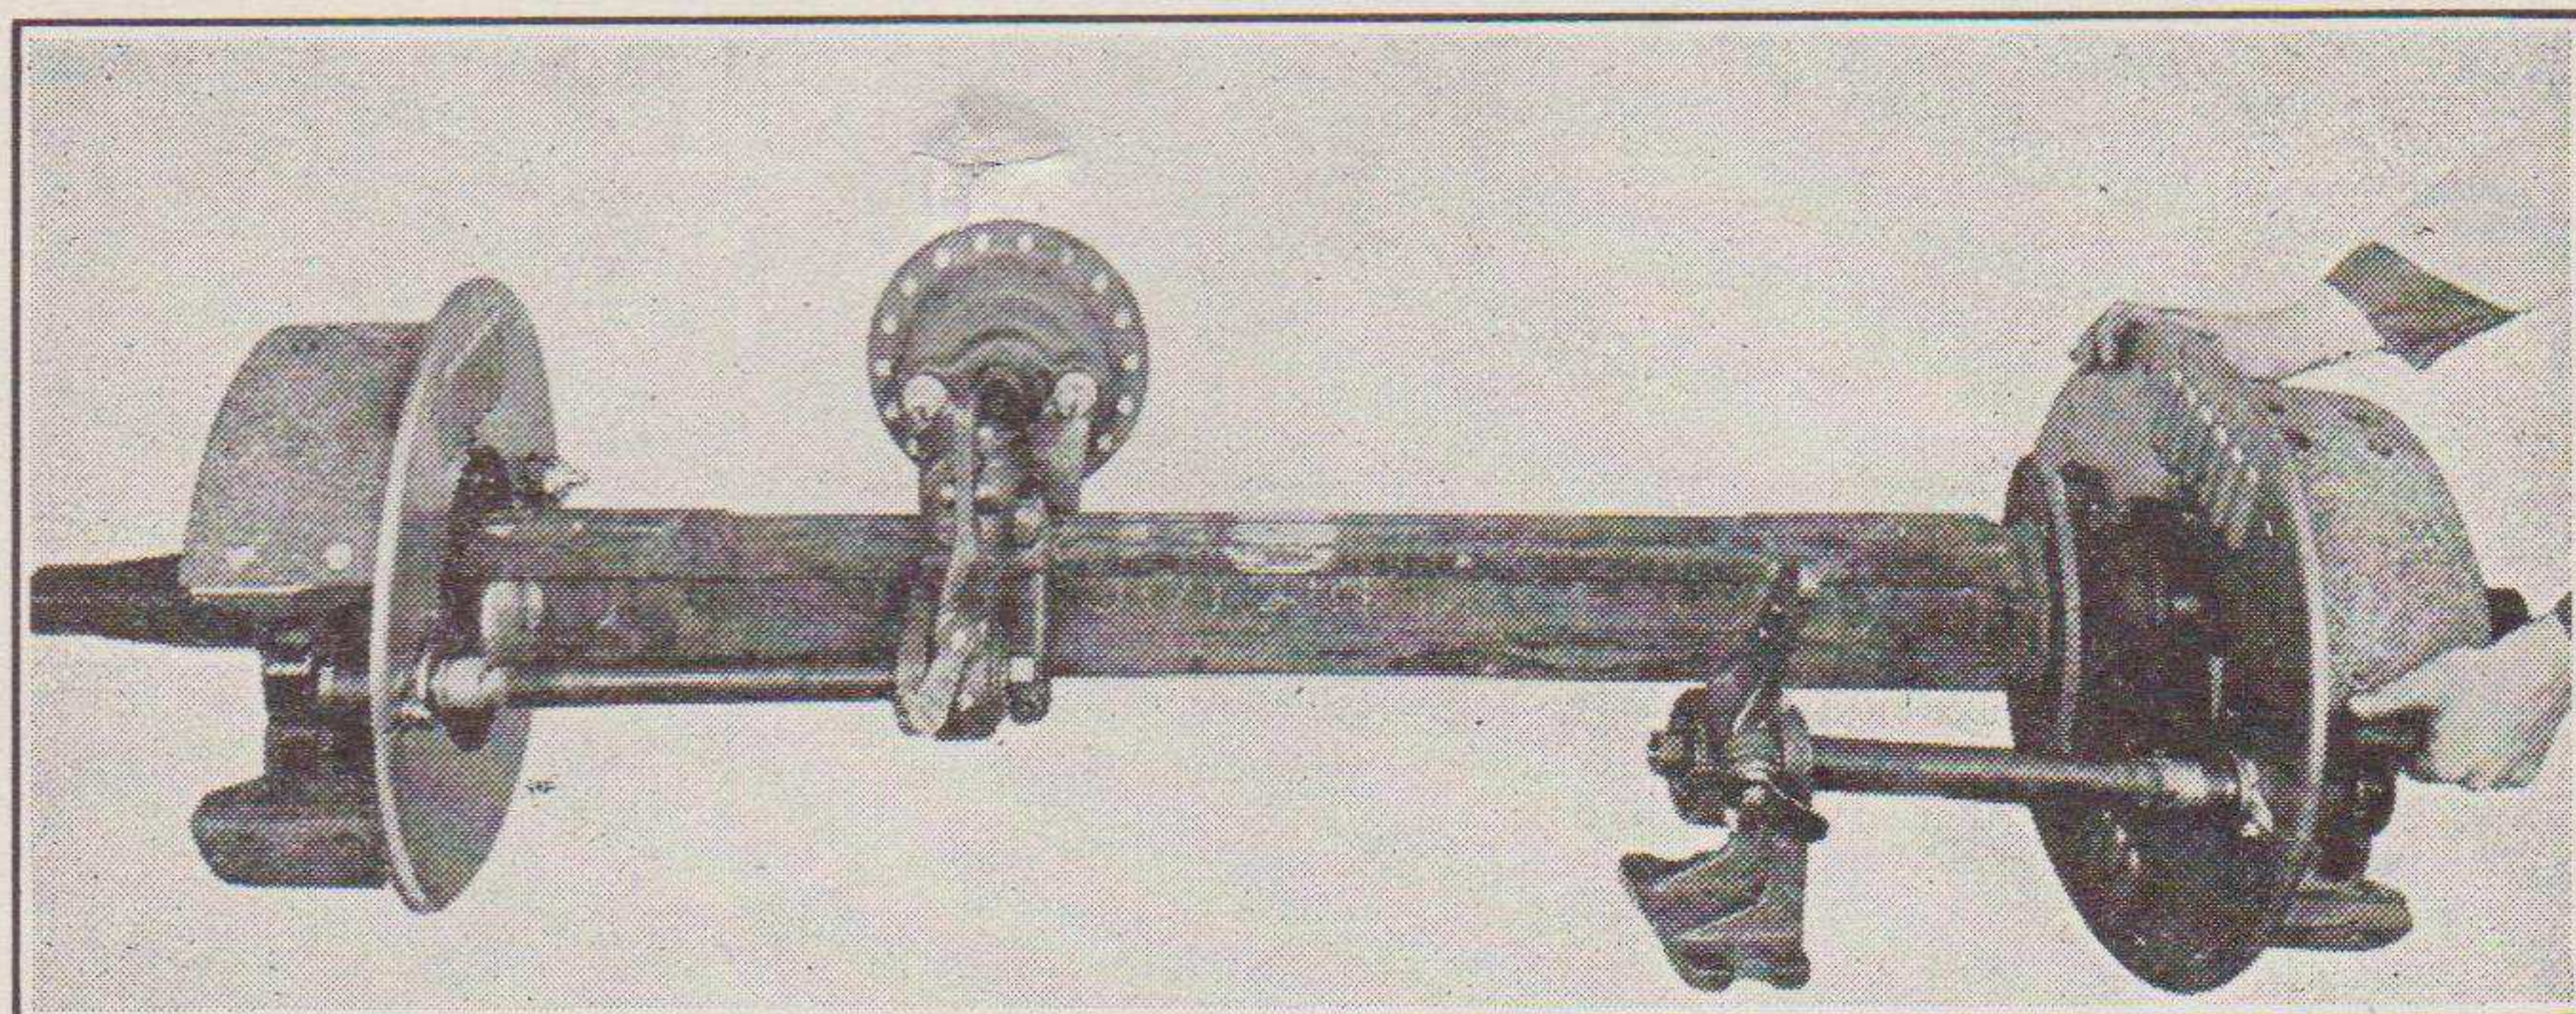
REMOVING BRAKE ASSEMBLIES
